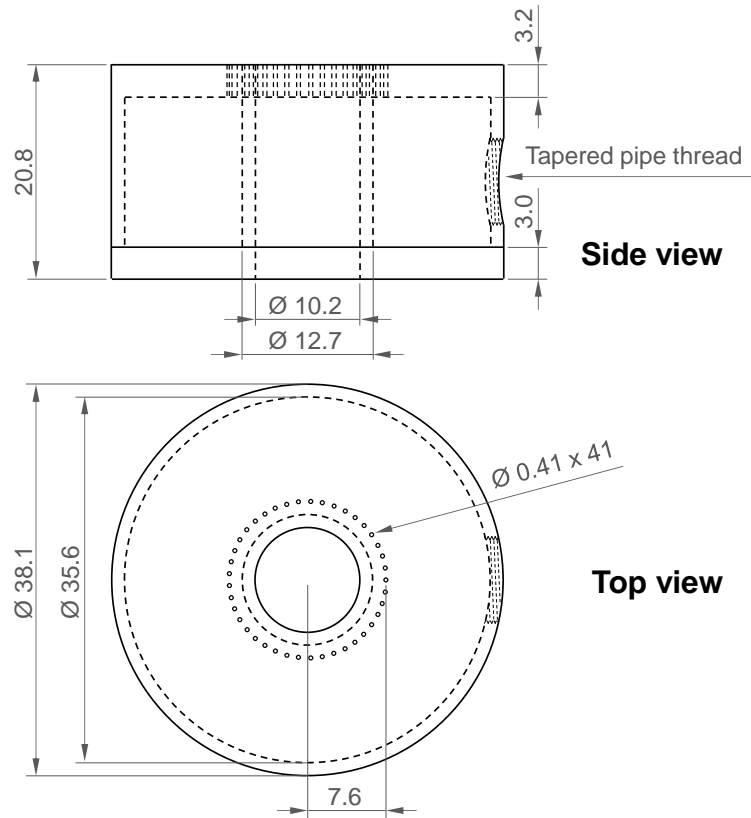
Sketch of the brass ring burner, with dimensions in mm.
